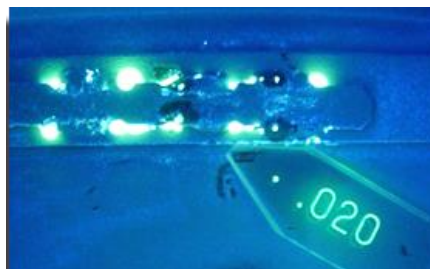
Dye Penetrant. Weld cracks made visible by dye penetrant inspection method under black light.¹
